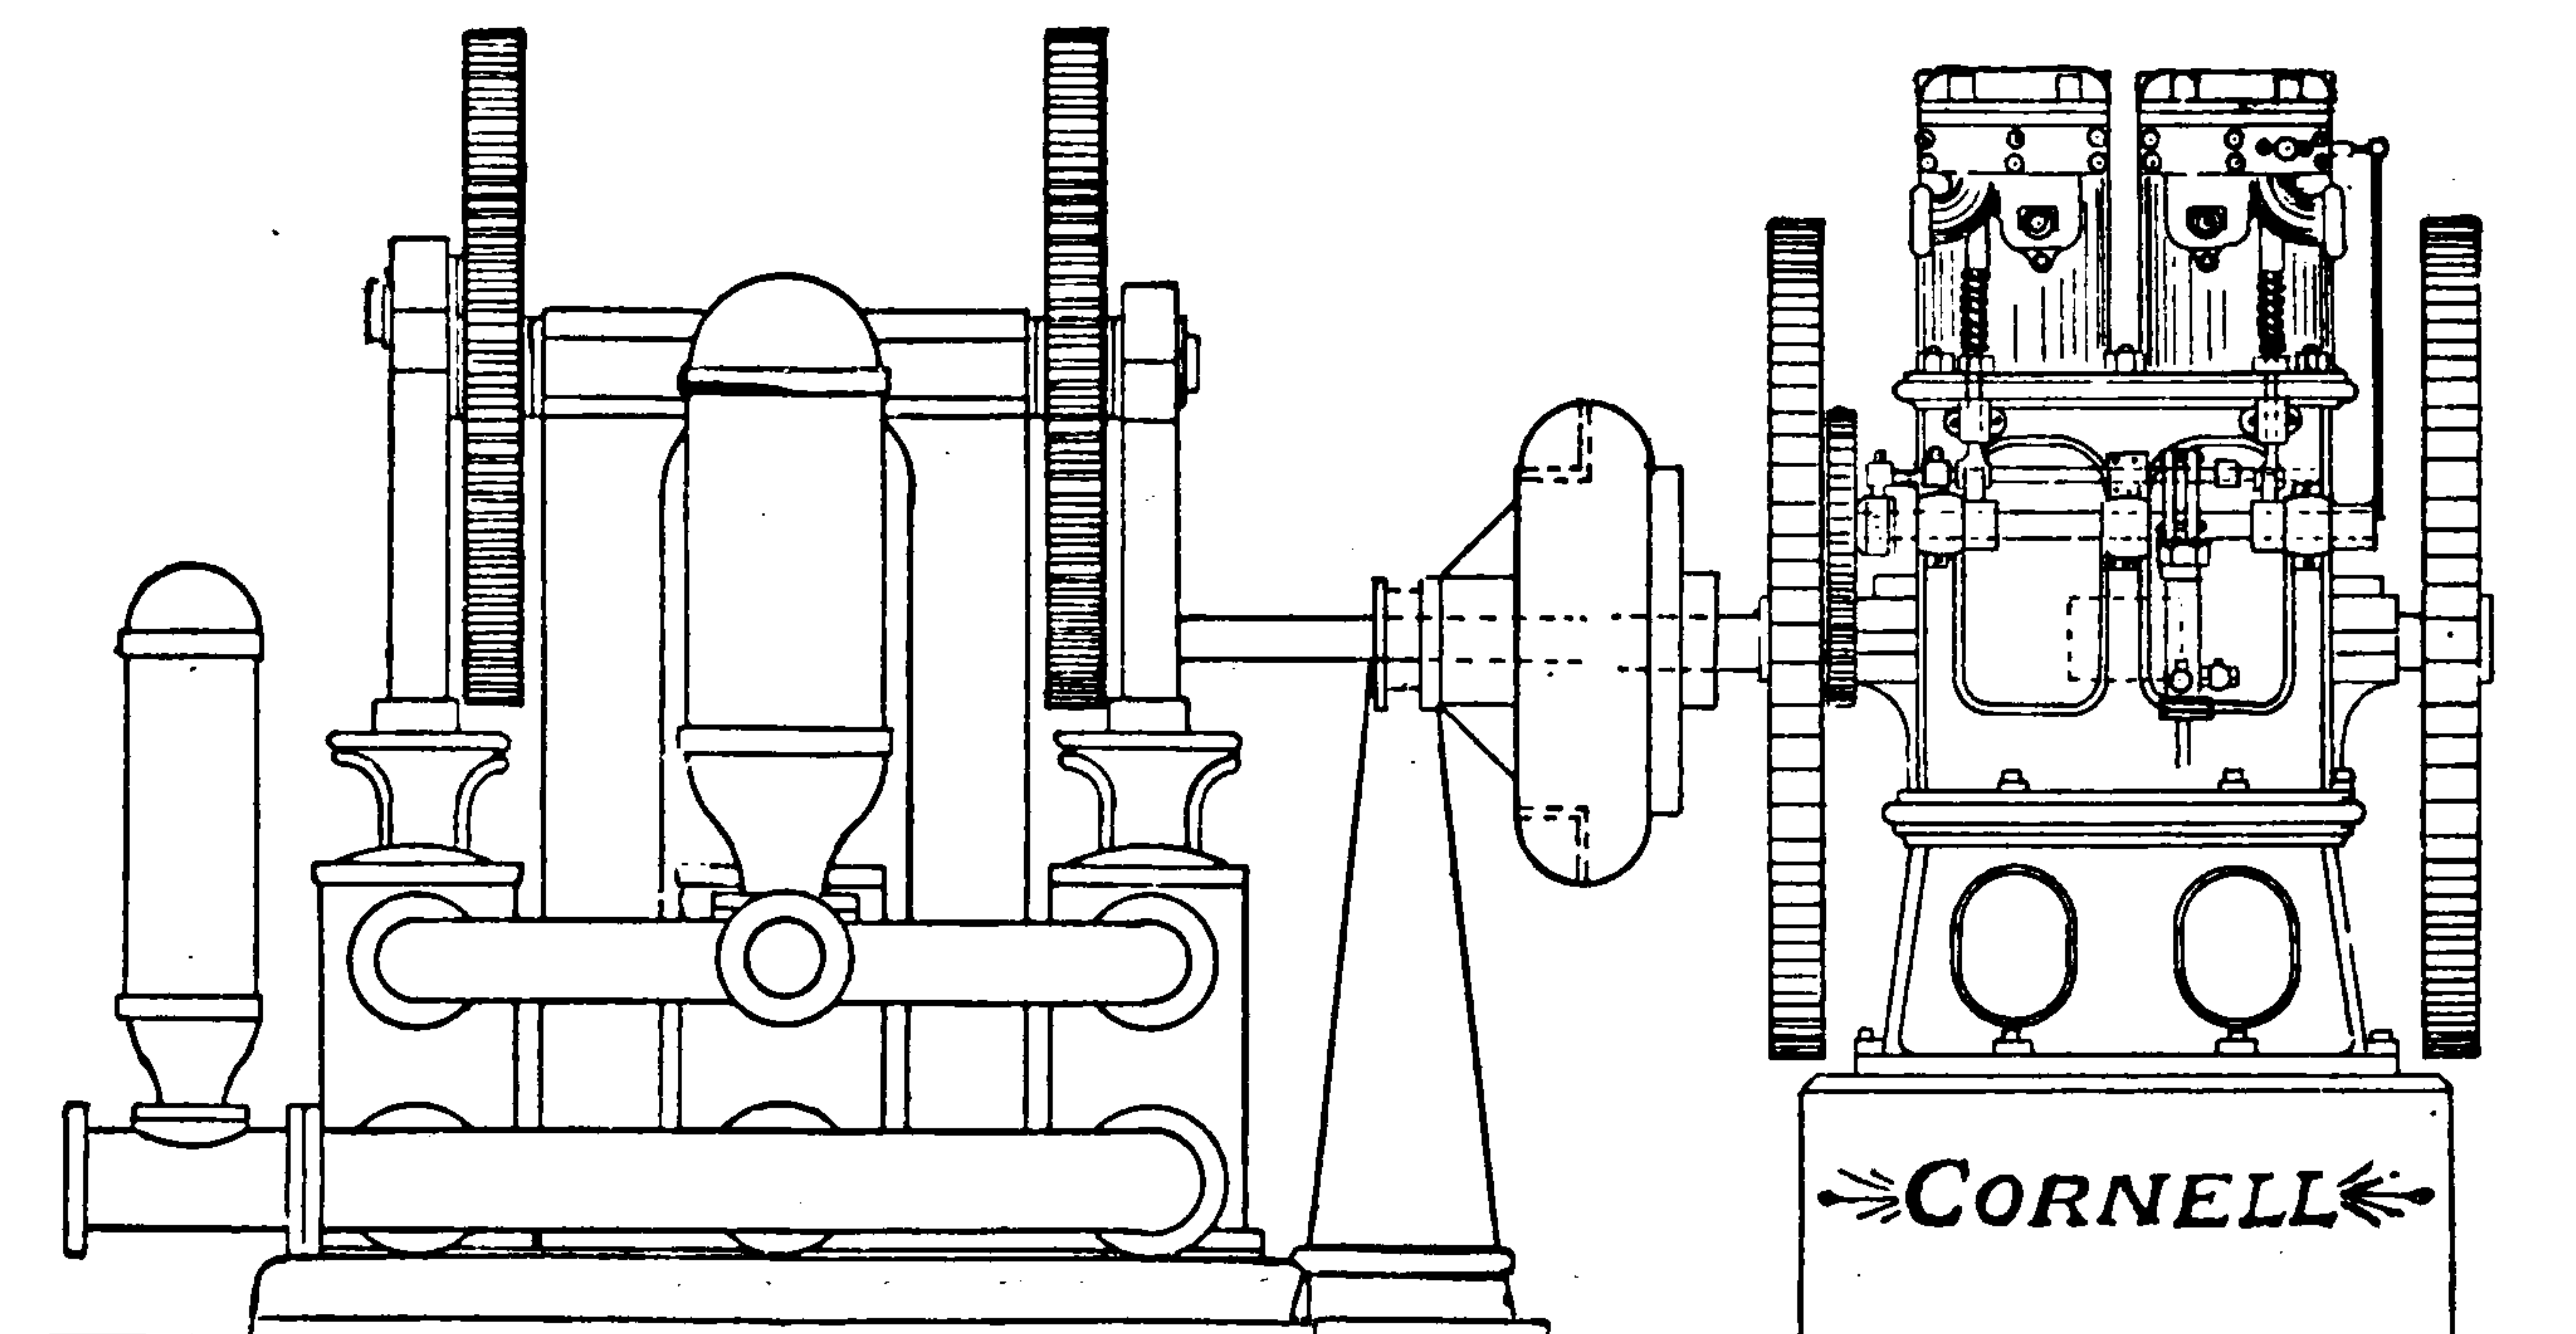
DOUBLE CORNELL PUMPING PLANT.
